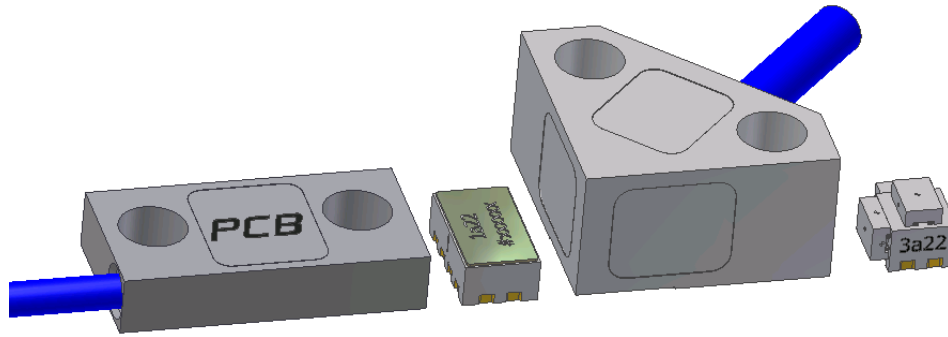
Scaled comparison of packaging configurations, shown approximately three times actual size. At left is the metal case with its cable; next to that is the surface mount ceramic leadless chip carrier with its 80% reduction in footprint. A triaxial configuration is shown with the same mounting hole pattern as the single axis metal case (but with an 8-wire cable.) To the right is the surface mount triax, with its three individual flip chip sensors attached to the orthogonal surfaces of the surface mount ceramic block. Since the new sensor is hermetic, it can serve as its own package. Modification of the MEMS element to a “flip-chip” configuration with solder balls allows solder connections to a circuit board or the surface mount triax block. The footprint of the flip-chipped sensor would be an additional 80% reduction from the surface mount package, or more than a factor of 20 from the original metal package size.
